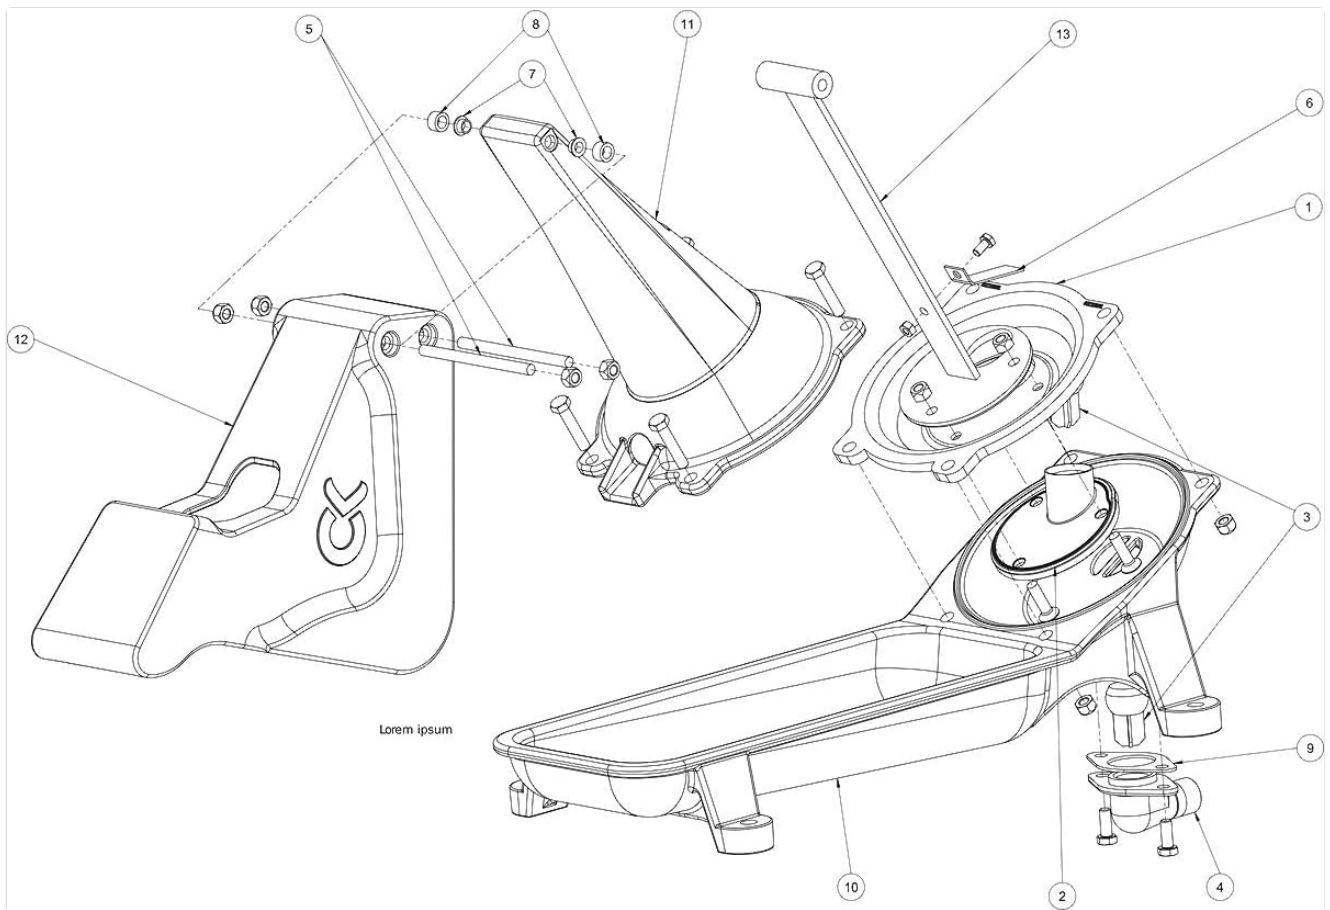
Exploded view of the Kerbl P100 Willow Pump, illustrating the various components and their arrangement for assembly and maintenance.
